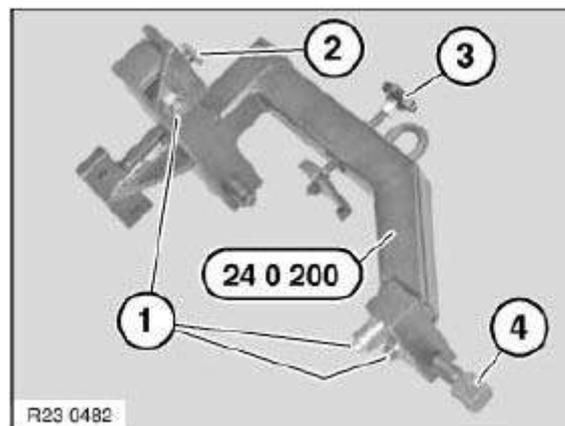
Identifying Transmission Adapters, Thrust Piece And Spindle
